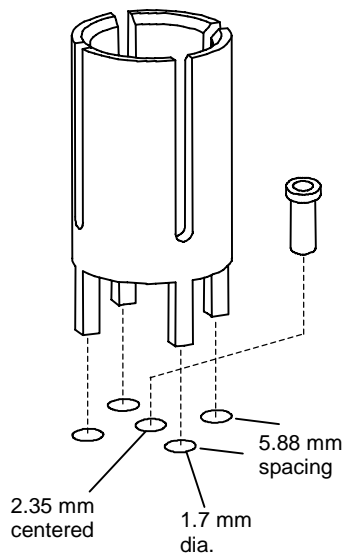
Probe Ground Socket and Single Contact Socket for PC Board Testing
